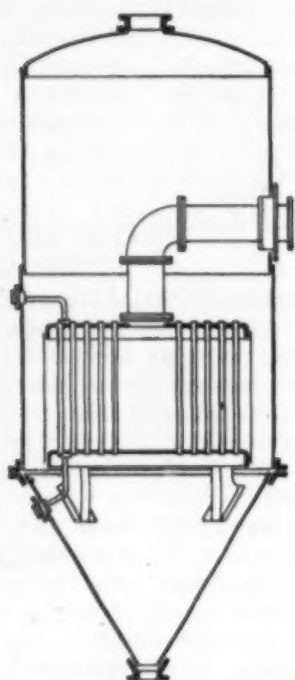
BASKET TYPE OF VERTICAL TUBE EVAPORATOR
